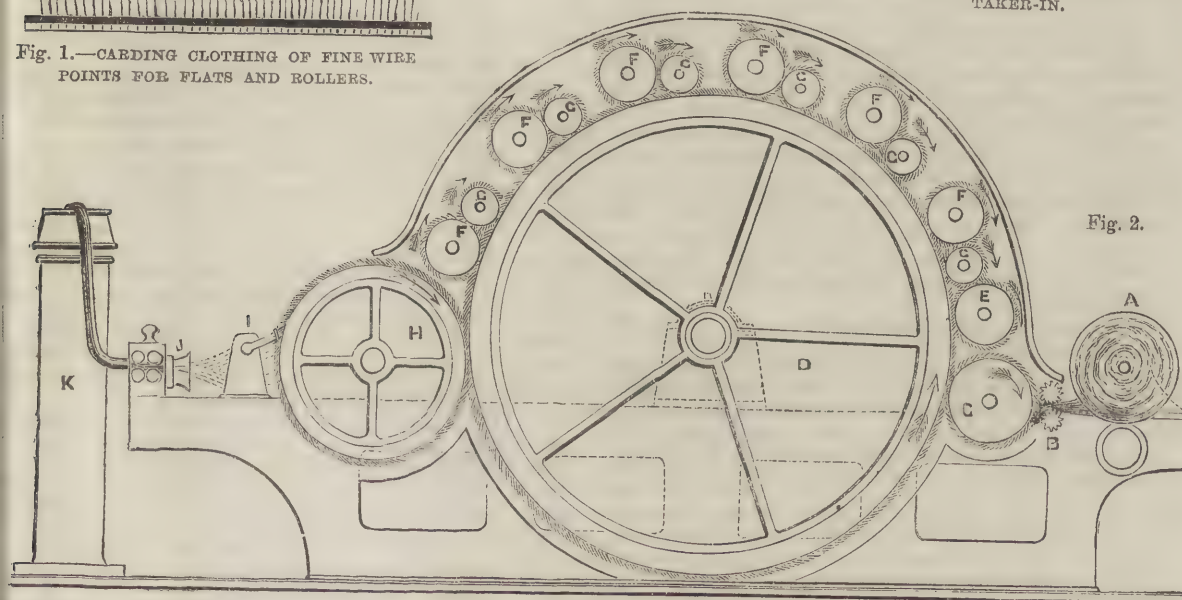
SECTIONAL VIEW OF CARDING MACHINE.
